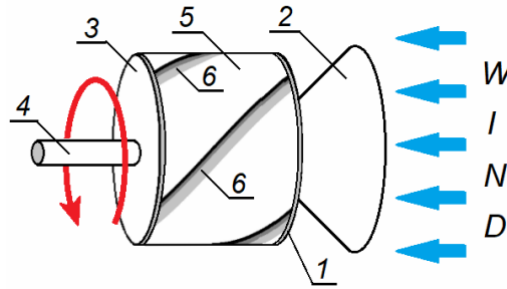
WET rotor with closed-blade design, perspective view. Rotation direction indicated. Components: (1) front plate, (2) flow concentrator, (3) axial barrier, (4) central shaft, (5) helical blades, (6) lateral outlet channels.
